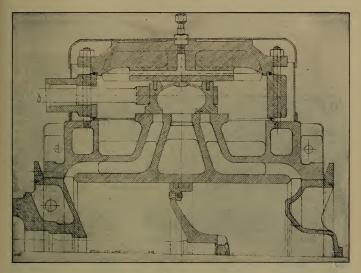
Sectional View of Steam Chest, Slide Valve, and Seat.
